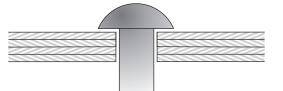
A rivet loosely fits inside the drilled hole.
